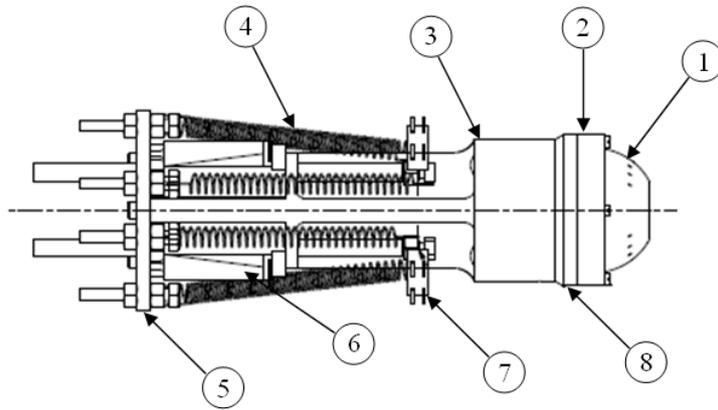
Lateral view of the eye robot prototype and its modules: 1) Eyeball, 2) Front flange, 3) Frame, 4) Spring, 5) Rear flange, 6) Linear motor, 7) Position sensor, 8) Eyeball support.
